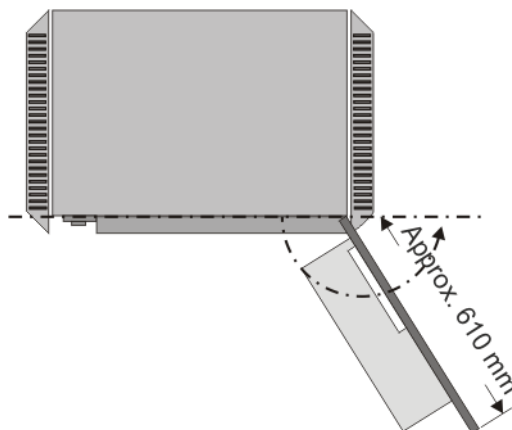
Minimum clearances with top-mounted / technology cabinet
